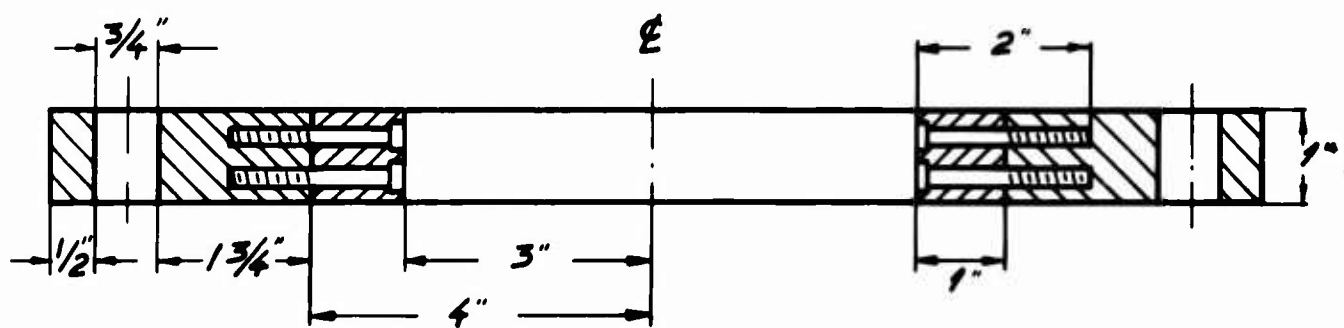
RING AND BAR CLAMPING PIECE
